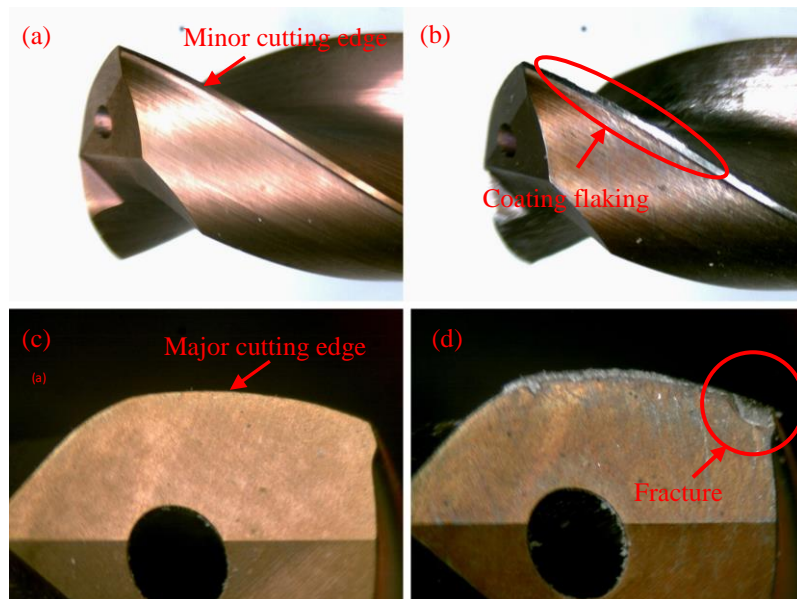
Optical images of drill. (a) Side view of minor cutting edge before drilling, (b) Side view of minor cutting edge after drilling, (c) Bottom view of major cutting edge before drilling and (d) Bottom view of major cutting edge after drilling.
